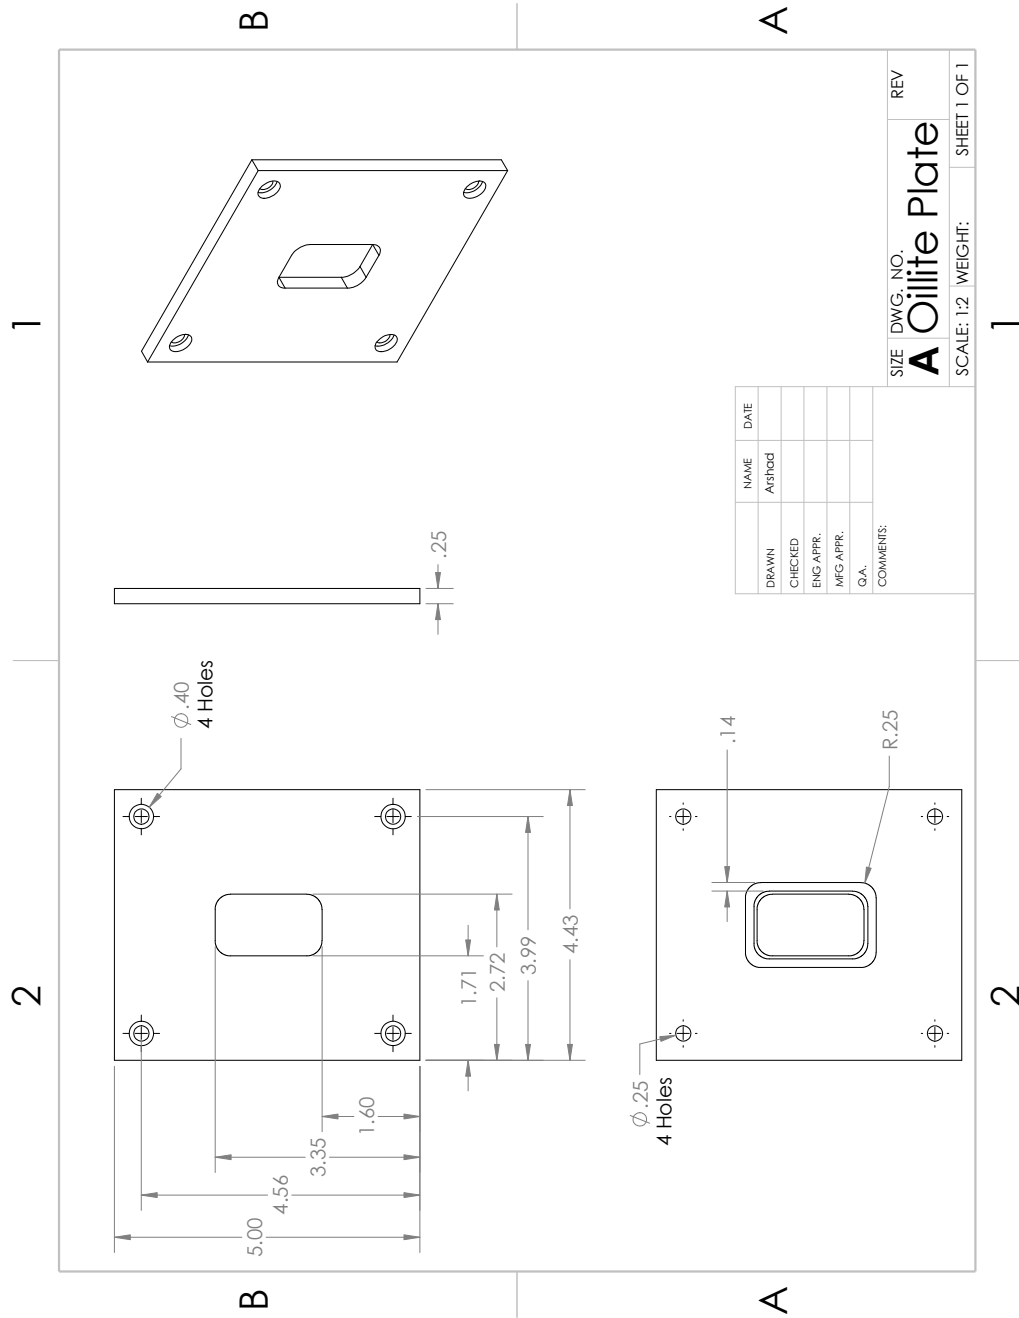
Drawings of oil-impregnated bronze seal plate.
